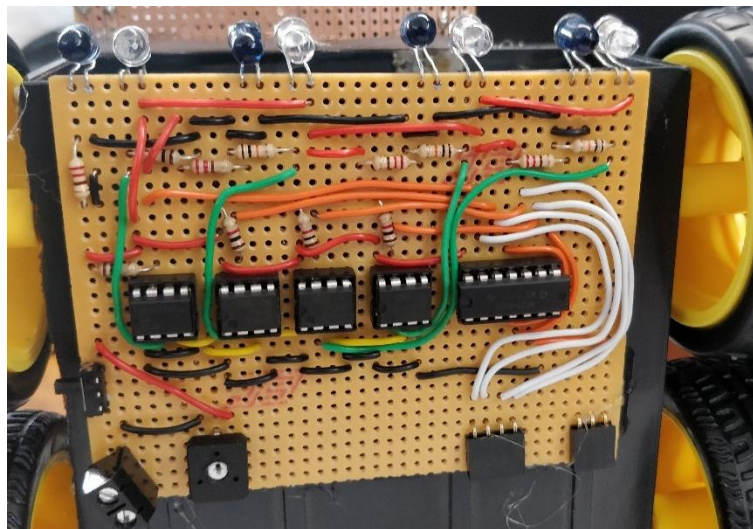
Bus Buffer Circuit Soldered onto a Stripboard
